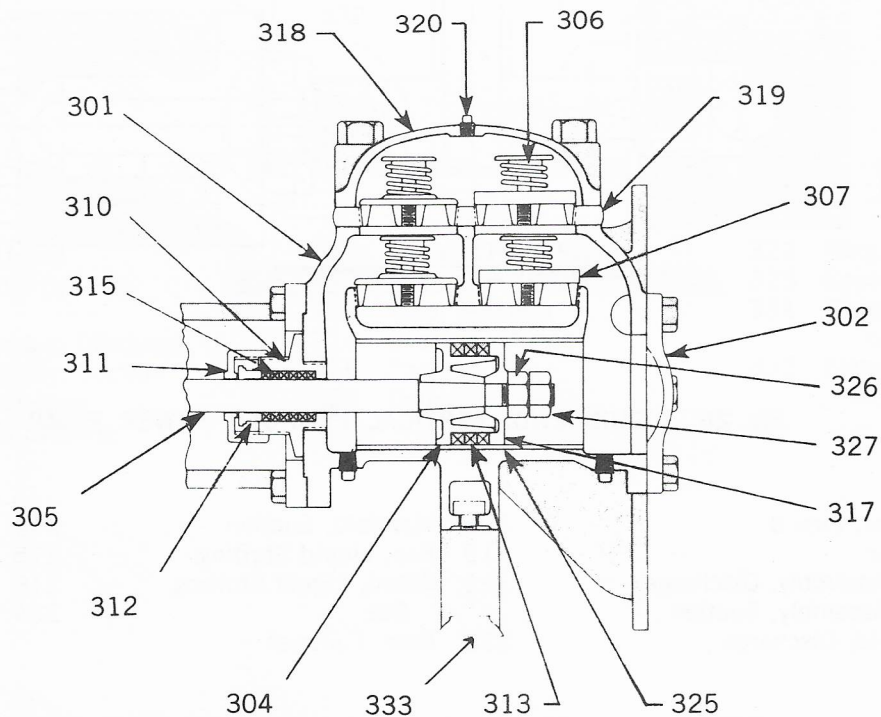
LIQUID END, HORIZONTAL VALVE PLATE PISTON PUMP
